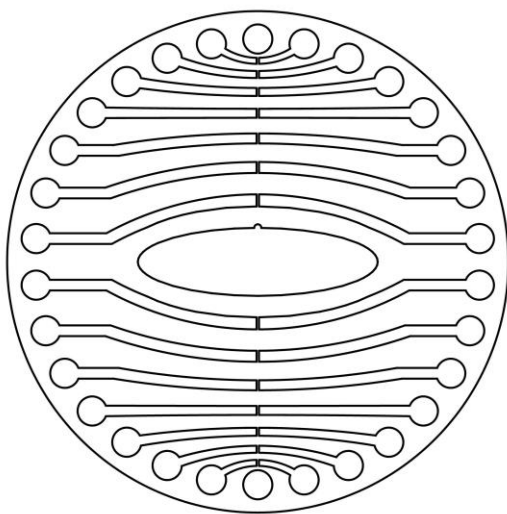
Specially designed, 3D printed wedge for smooth airgap surface
